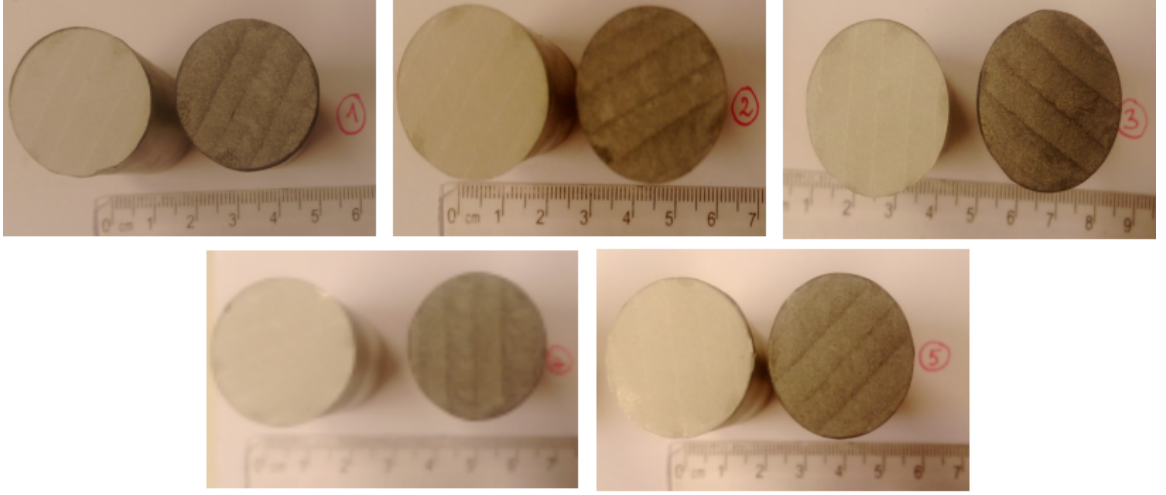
Photographic images of the fracture surfaces of pure aluminum coatings.
